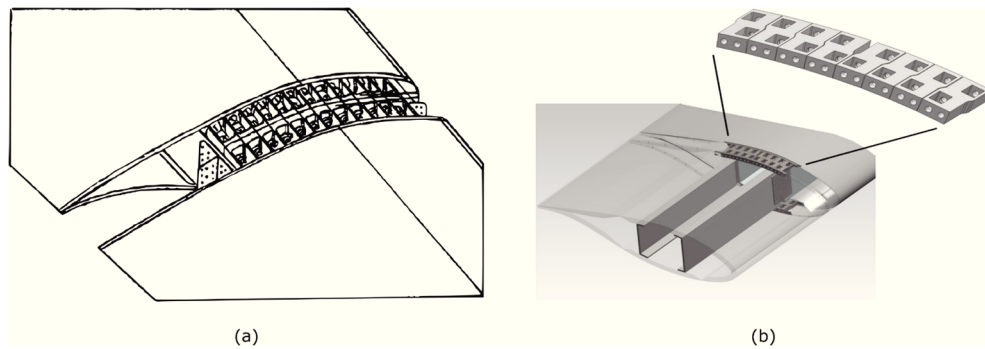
Prototype segmented blades using an intermediate plate. (a) Blade joint developed during the UpWind project. Reproduced from Ref. [59]. (b) Blade joint with alternating long and short bolts as suggested in Ref. [54].
